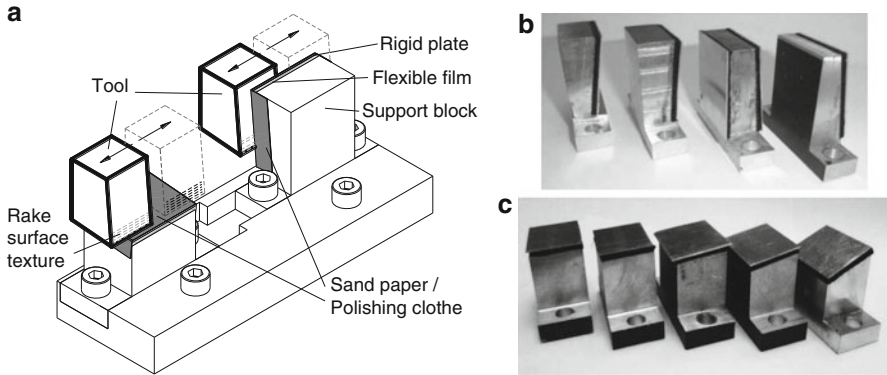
(a) Schematic representation of the Grinding and Polishing Unit (GPU) and photographs of the support blocks for reconditioning the (b) rake and (c) clearance surfaces
